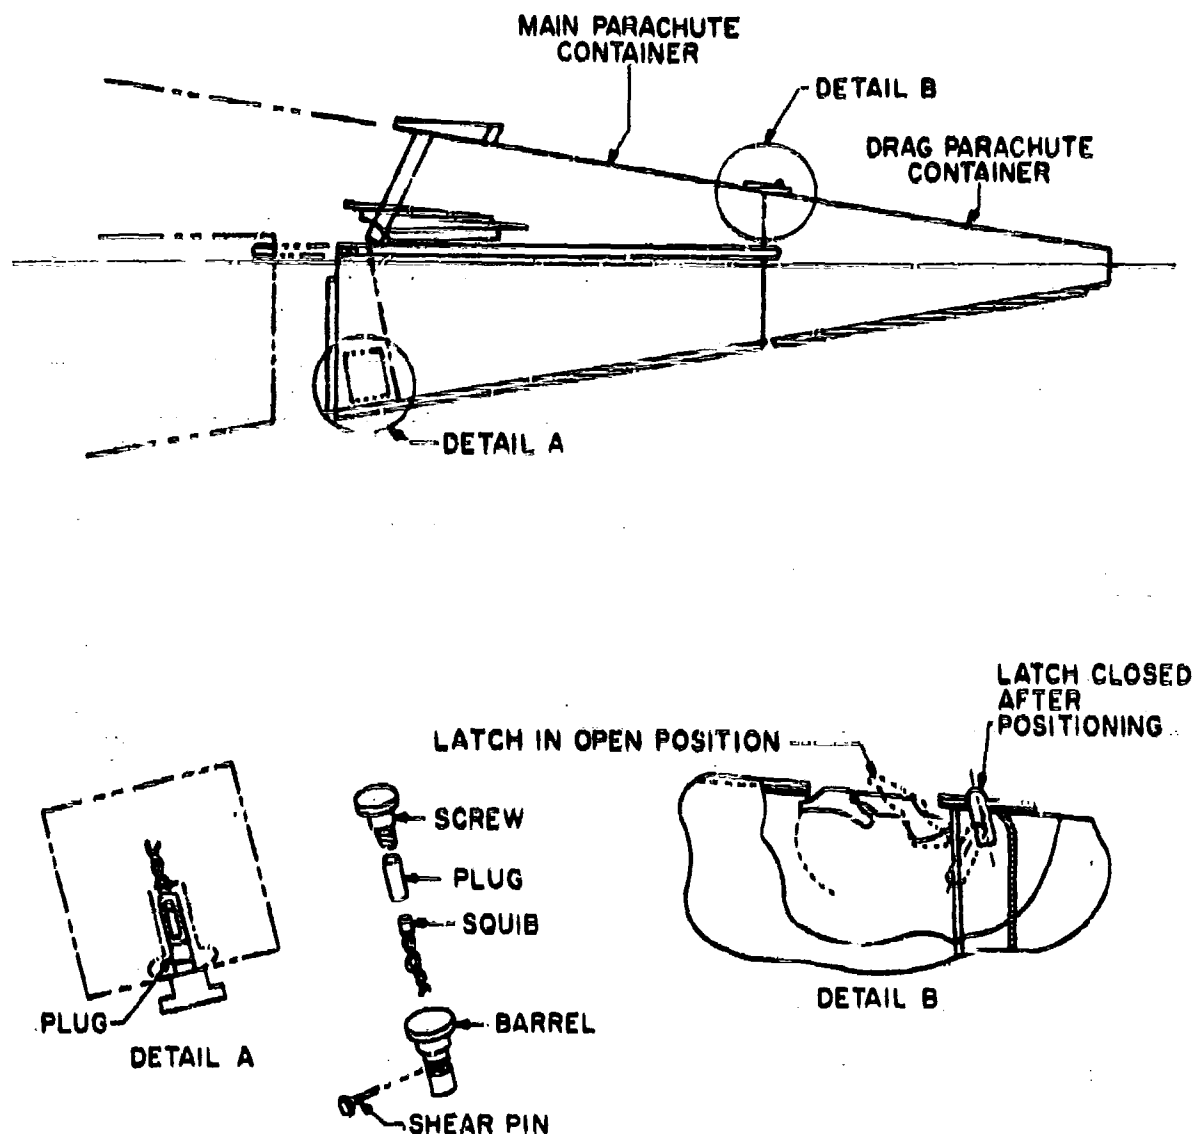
Exploded Bolt - Shear Pin Type
